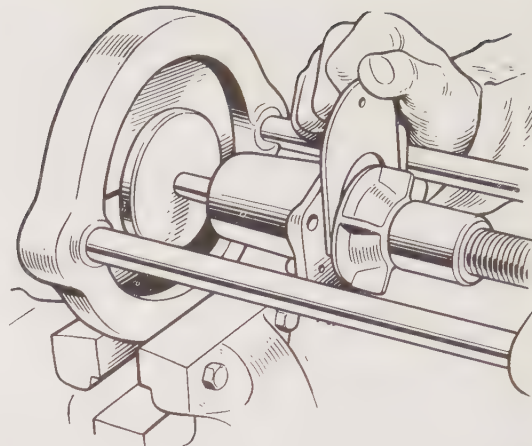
17 Use of spacer-gauge when refitting pump impeller to spindle.
